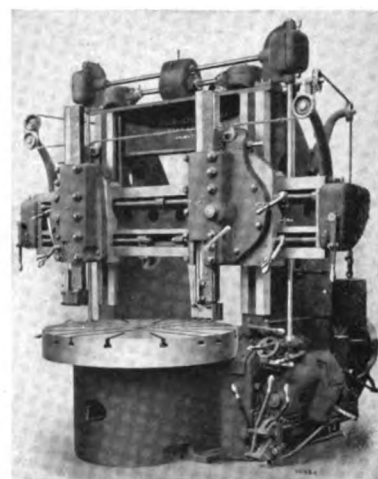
62" (1575 mm.) Heavy Boring and Turning Mill
